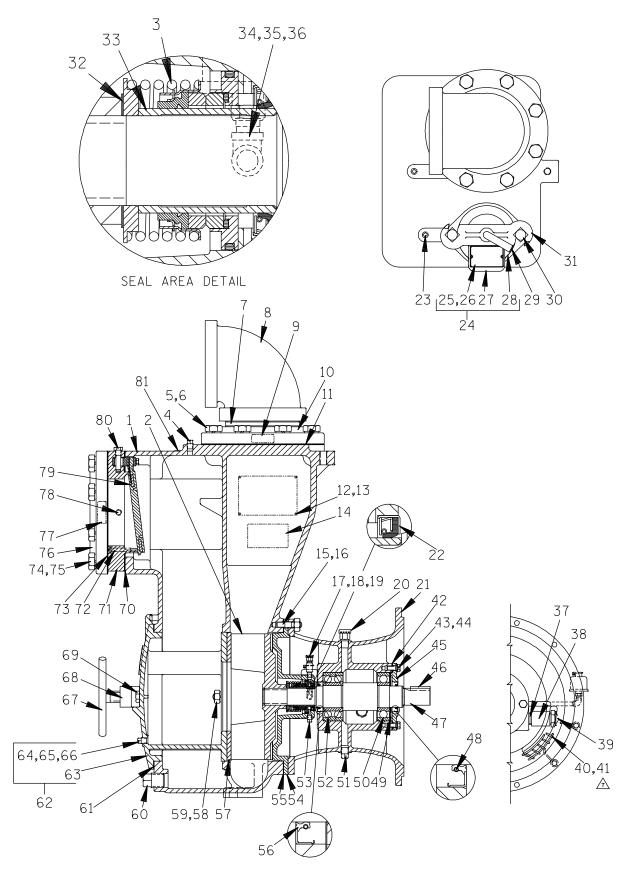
16C20-(SAE 4/10) Pump End Assembly
